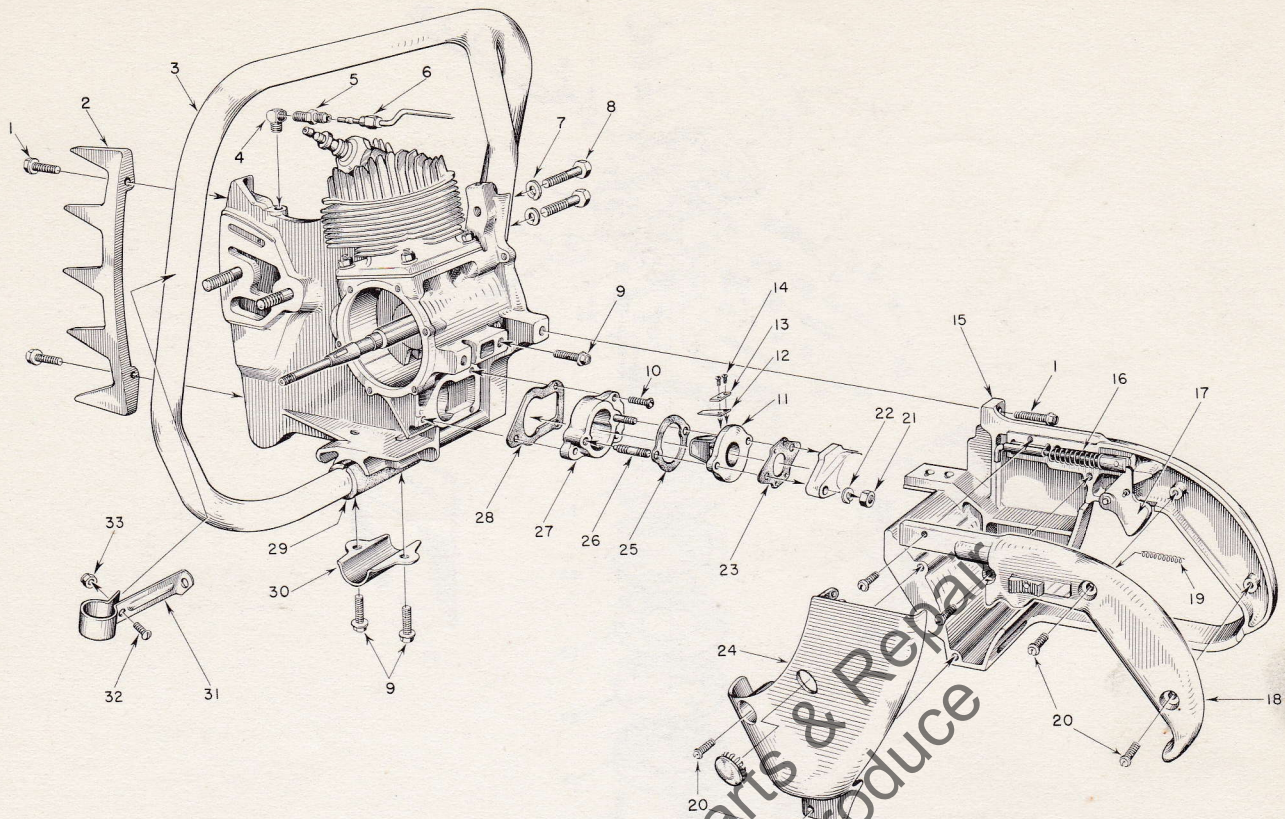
HANDLE, GRIP AND REED VALVE PARTS
